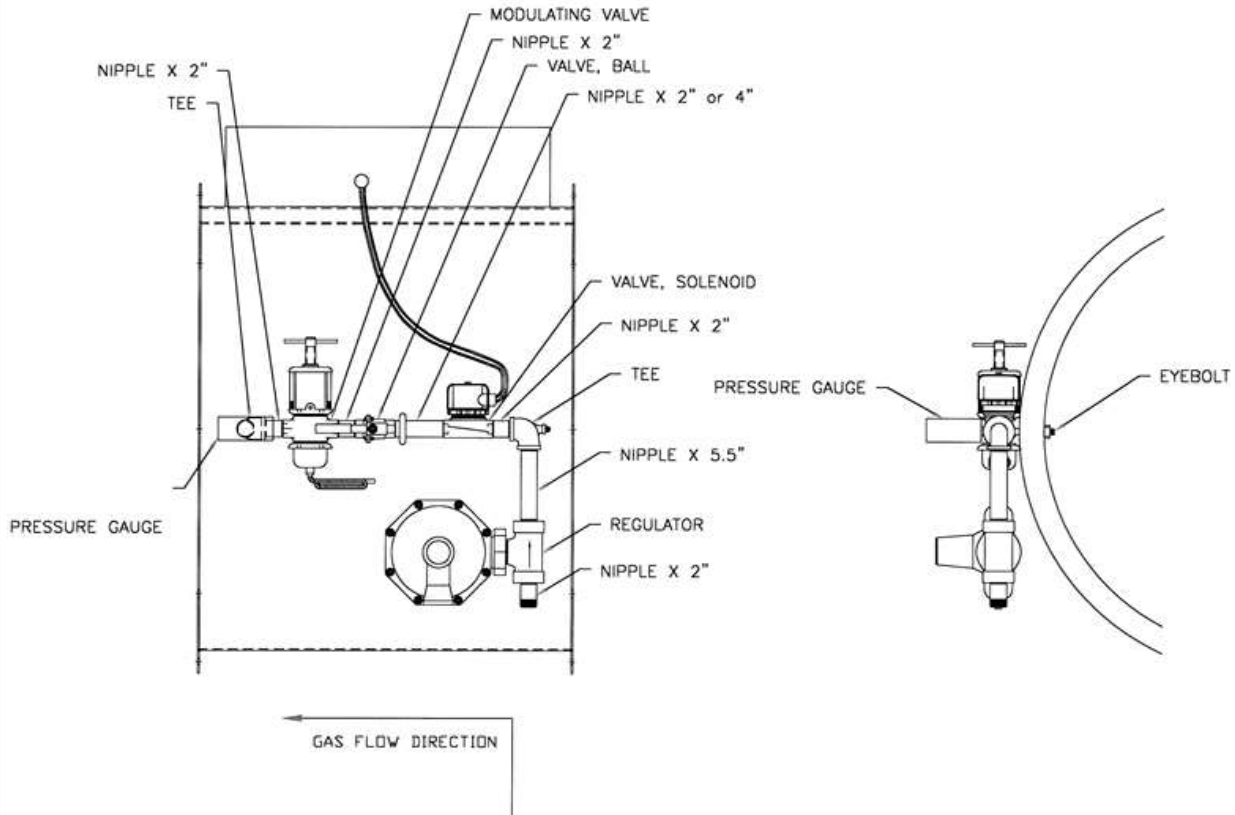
MODULATING VALVE KIT ASSEMBLY FOR AXIAL HEATERS
